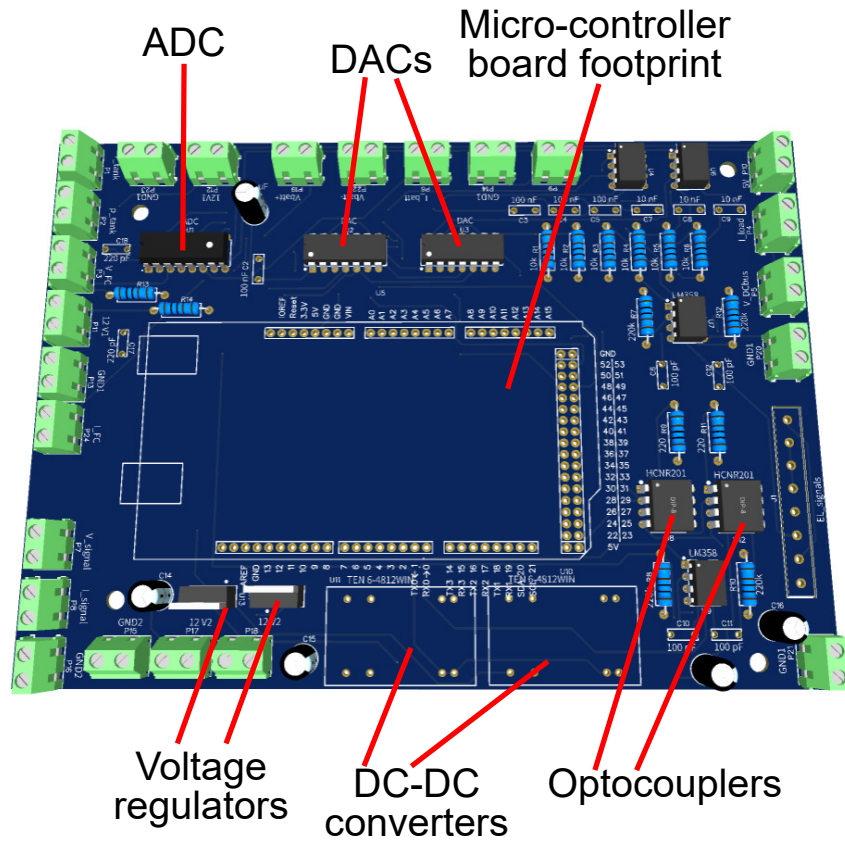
3D image of the control layer PCB for Smilla HIL test bench.
